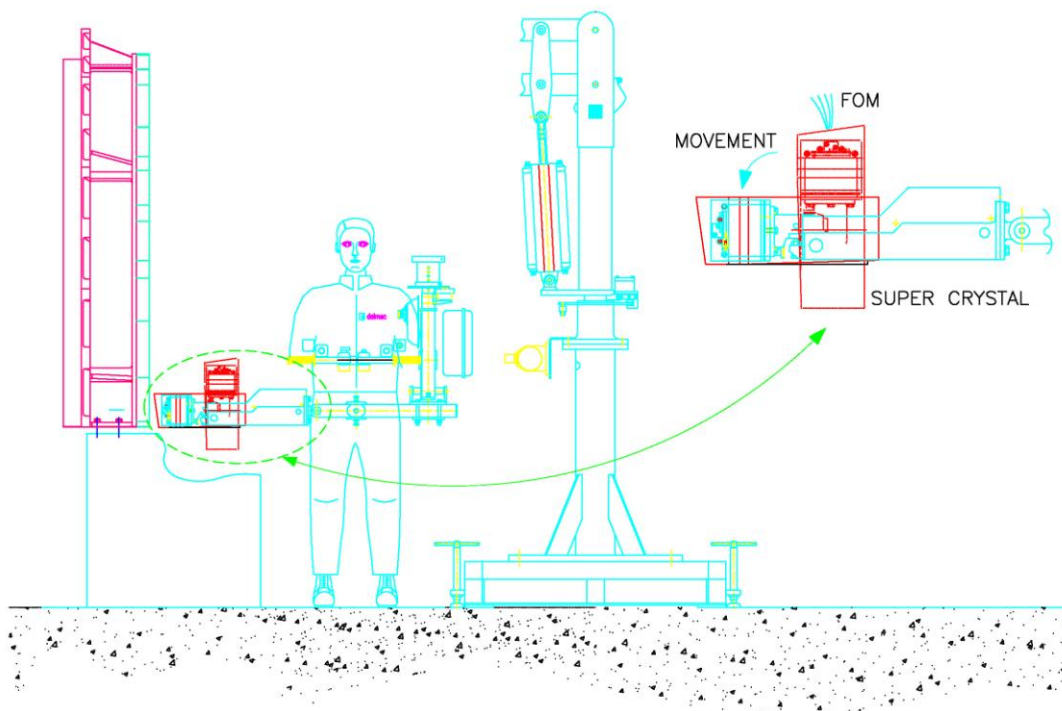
End Cap Super Crystal Assembly process with pneumatic manipulator
